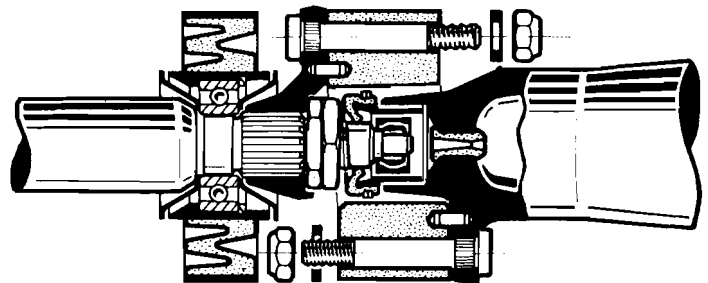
Propeller shaft centre joint (Sec 1)
